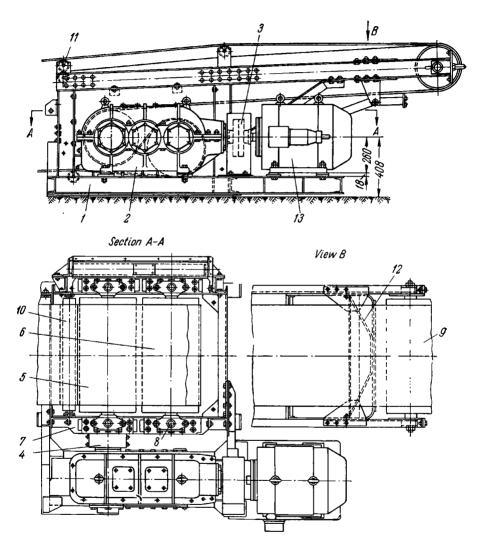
Drive head of the PTY-30 (RTU-30) conveyor
